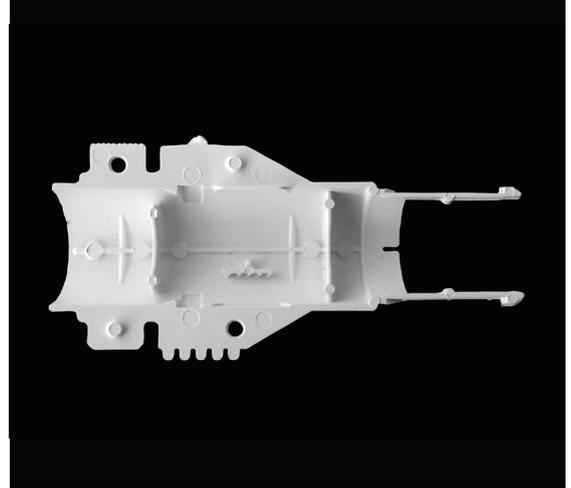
Component part created by Nypro to test injection molded parts using a PolyJet mold.
